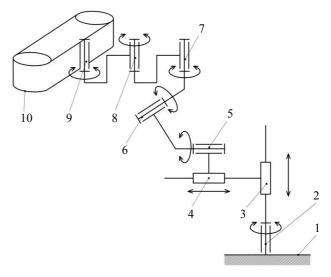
Kinematic diagram of the mobile robotic machine-tool for grinding the rolling surfaces of bandages rotating aggregates
